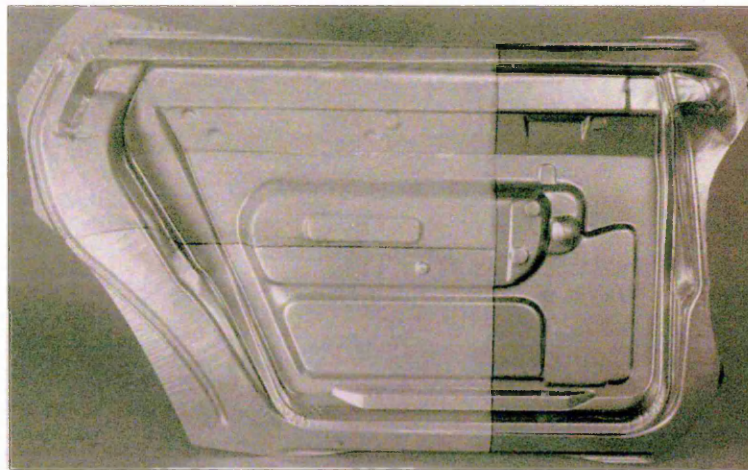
Picture showing an inner door panel that is made up of three different steels that have been laser welded together¹¹
